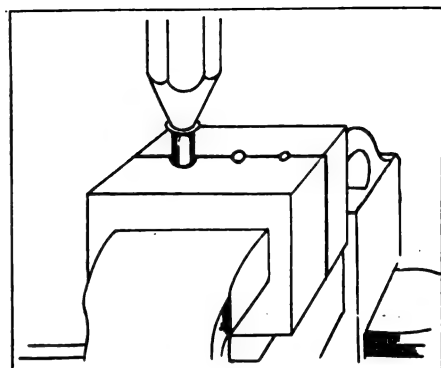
A Quick and Easy Way of Putting a Flange on Tubing.
